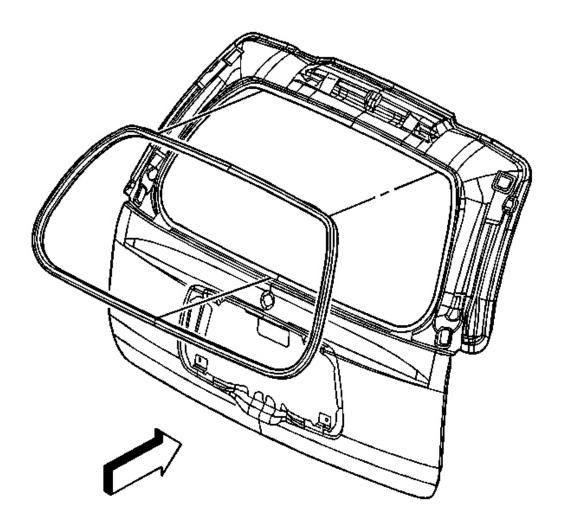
Identifying Liftgate Window Weatherstrip Courtesy of GENERAL MOTORS CORP.
